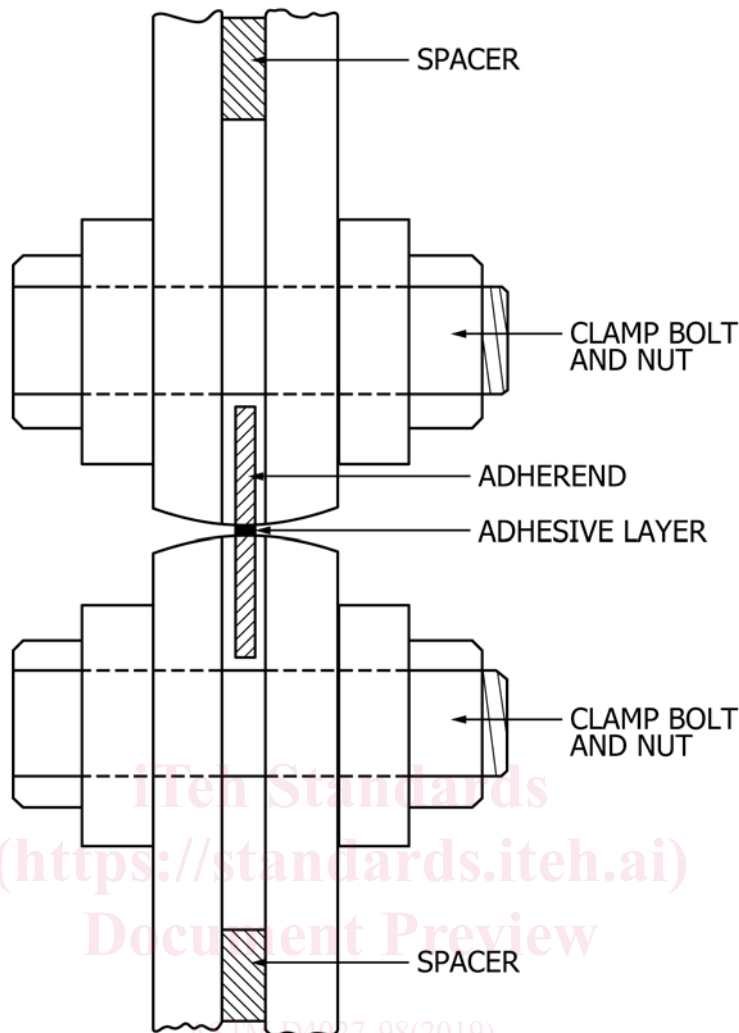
Top View of the Rail Clamps Showing How the Specimen Is Gripped for Testing
